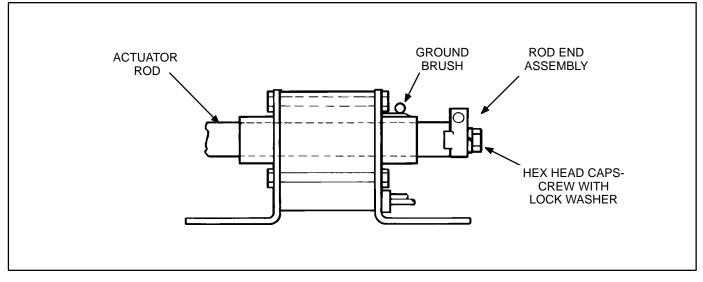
LINEAR ACTUATOR (40 TO 125 AMPERES)
